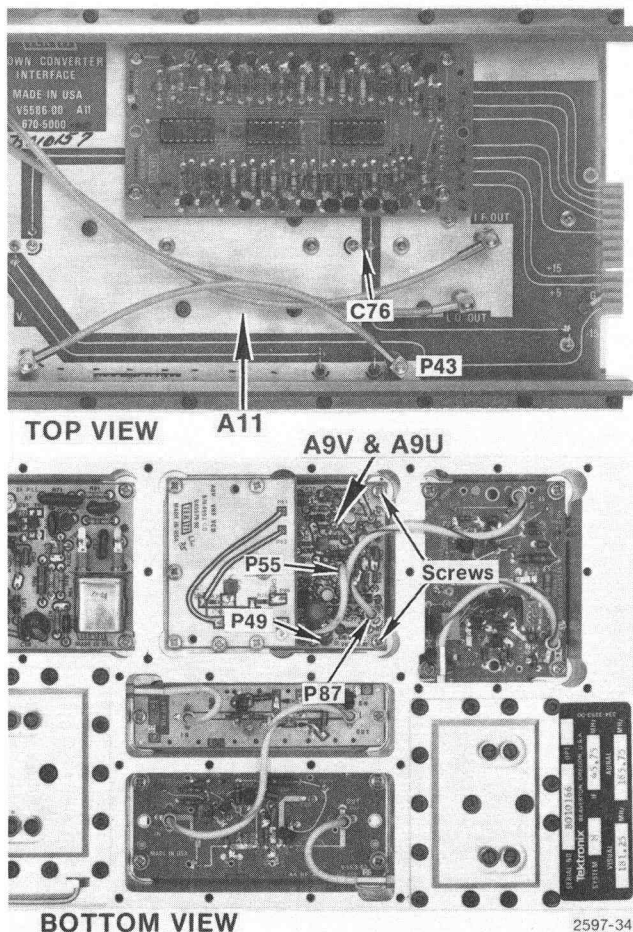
Removing the VHF and UHF VCO Amp boards, A9V and A9U.
